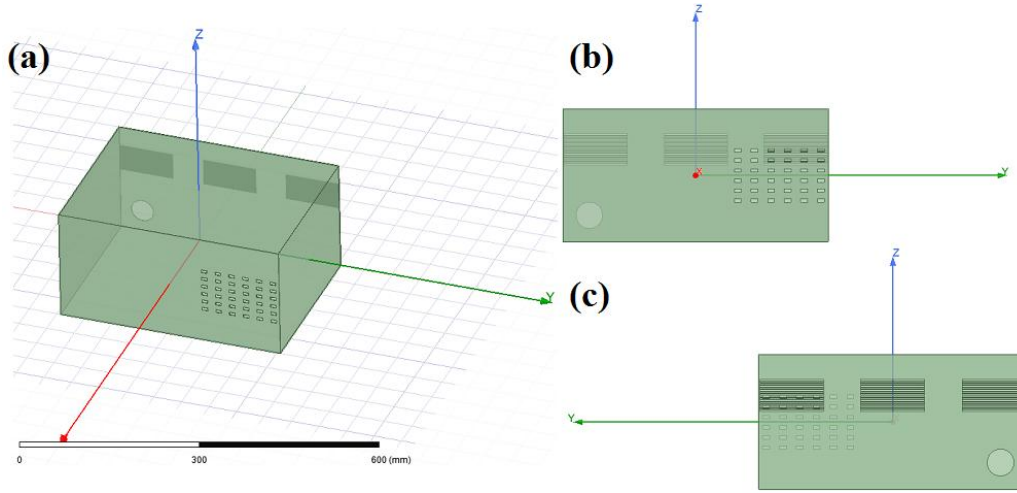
(a) 3D structure of the chassis, (b) front view of the chassis, (c) rear view of the chassis
